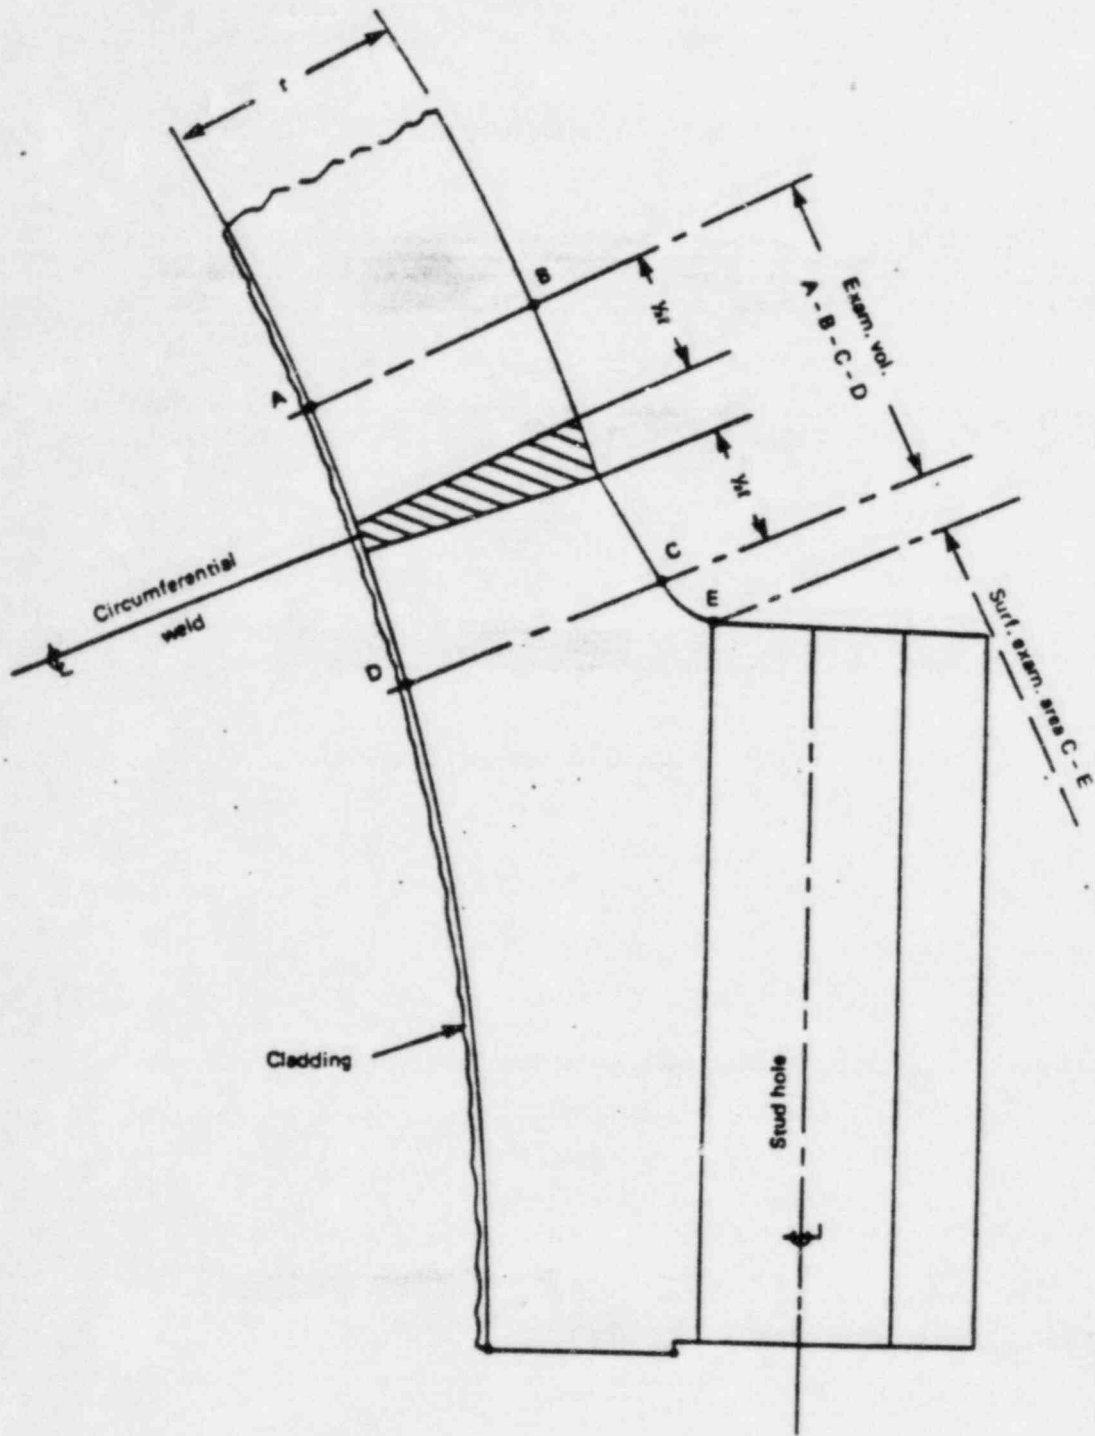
HEAD-TO-FLANGE WELD JOINT
